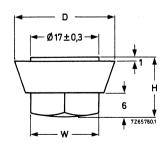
Synthetic cap nut; see Table 5 (next page) for dimensions D, H and W.
